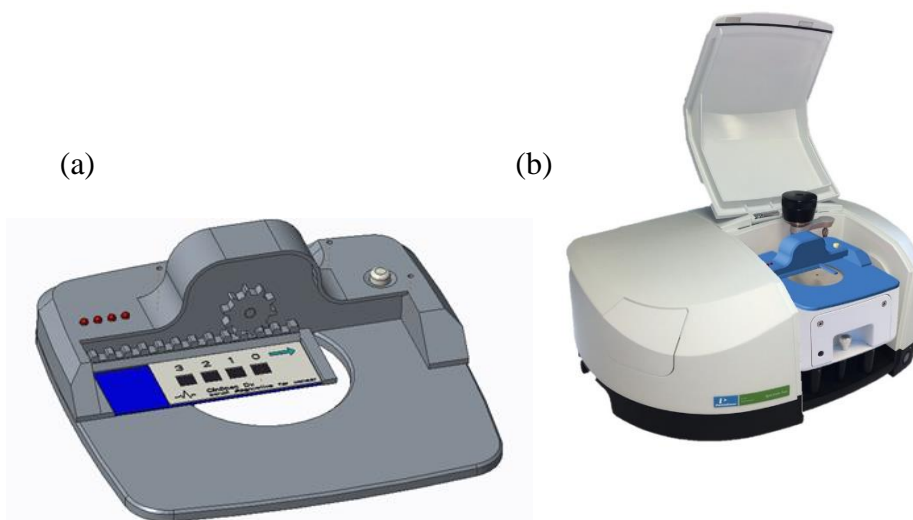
Former slide indexing unit design intended to compliment the Quest ATR universal accessory module. (a) CAD drawing of second slide indexing unit prototype with rack and pinion mechanism revealed. (b) Slide indexing unit mounted on a Quest ATR in a Spectrum2 spectrometer.
